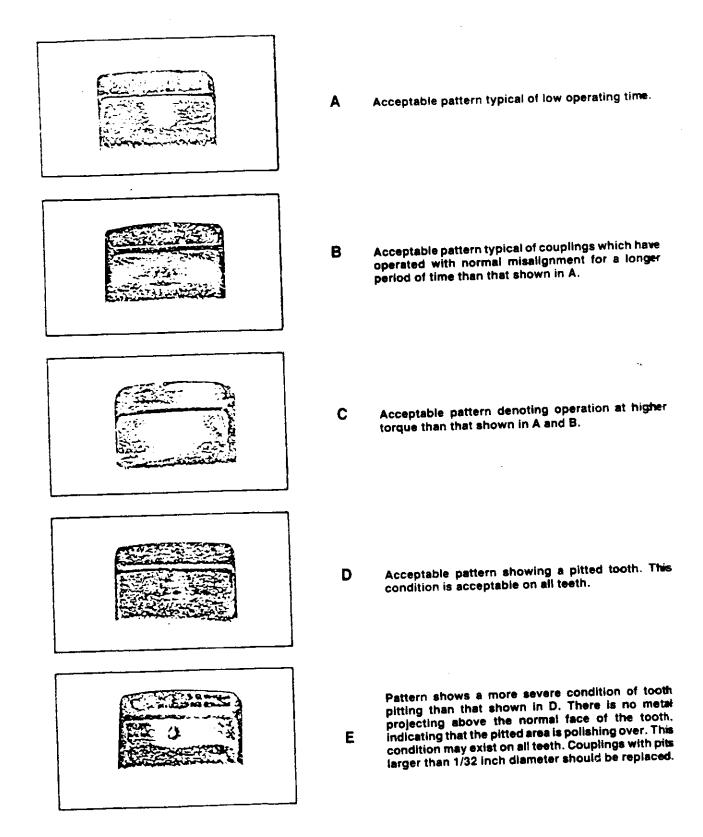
Coupling spline wear pattern for P/N 204-040-600-9 or -11 and P/N 212-040-600-7
